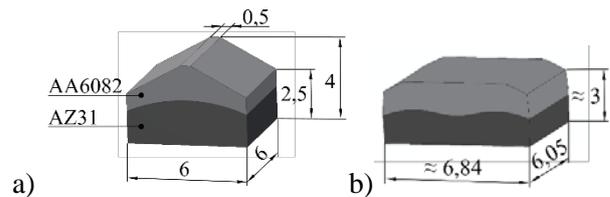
Dimension of the specimen a) initial state b) deformed state.
